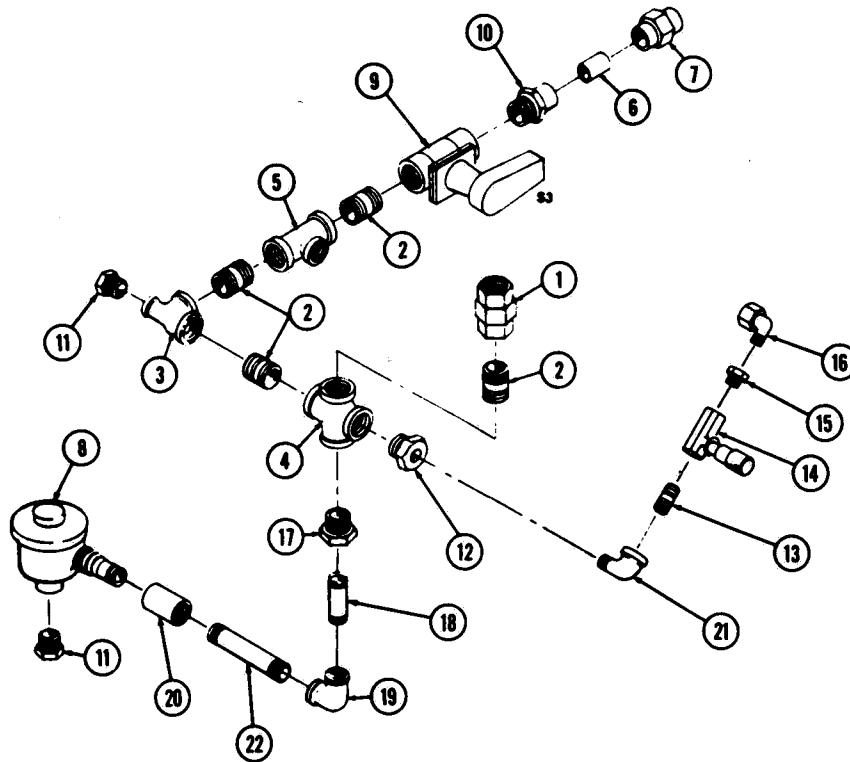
CHAMBER DRAIN ASSEMBLY.
